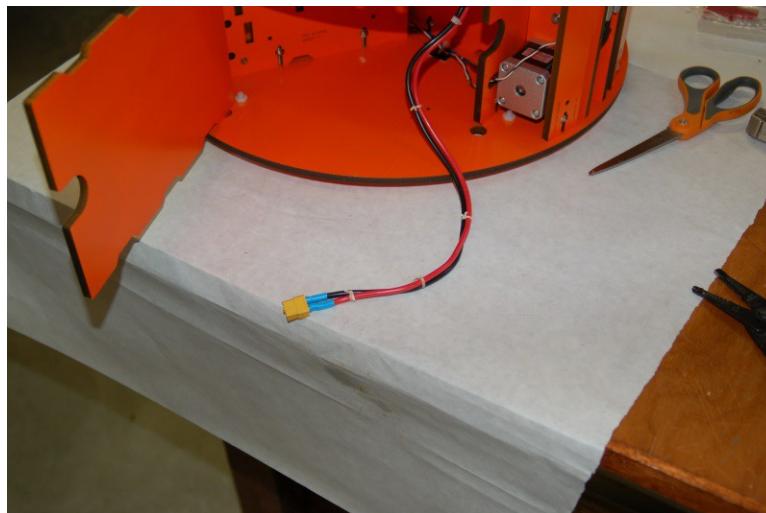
Heated bed wiring with quick disconnect installed.
